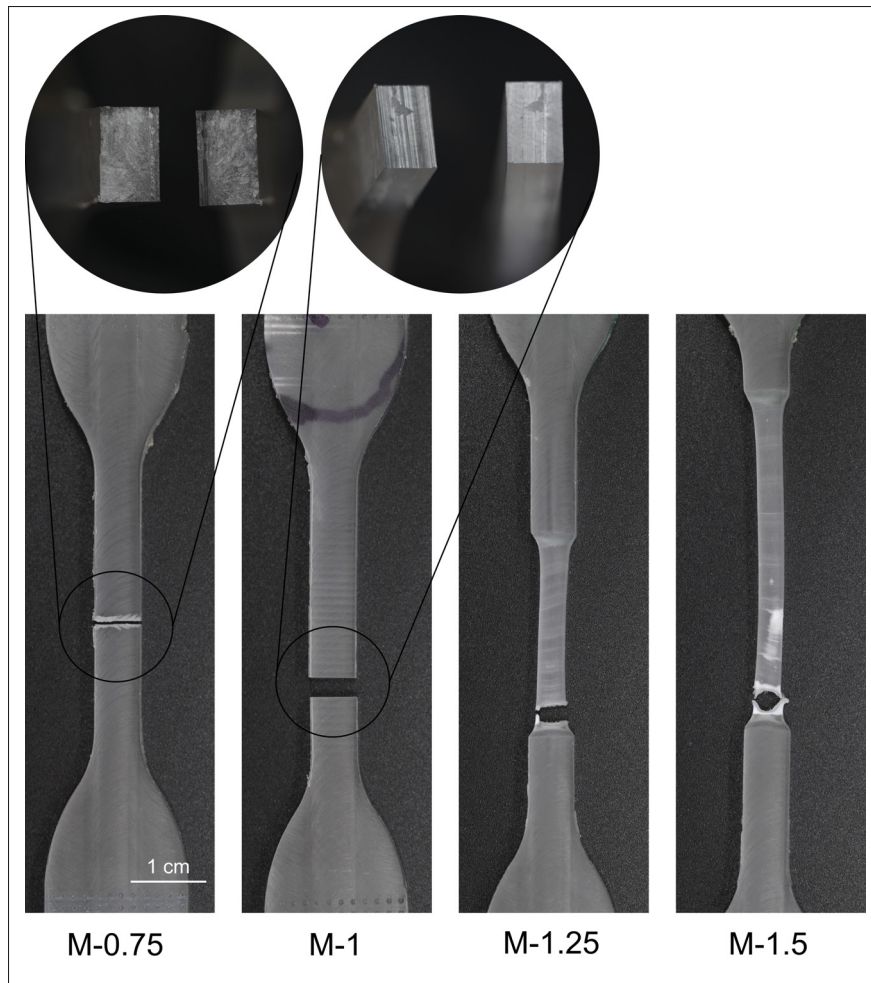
Fracture surfaces of machined samples. M-0.75 and M-1 exhibit fracture morphologies similar to their non-machined counterparts, characterized by interfacial failure and limited plastic deformation. In contrast, M-1.25 and M-1.5 show extensive plastic deformation prior to failure, indicating full recovery of ductility
